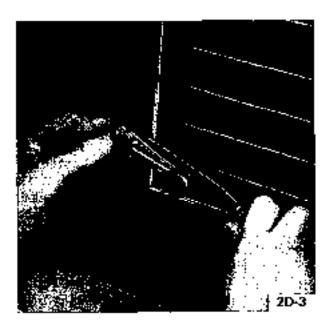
D-3 Inserting Tool Between Handle and Nylon Disc
